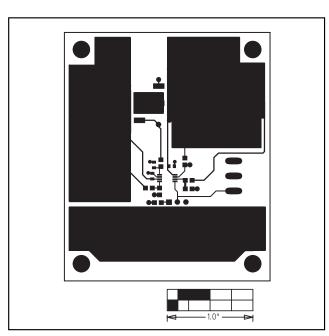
MAX8536 EV Kit PC Layout—Component Side
